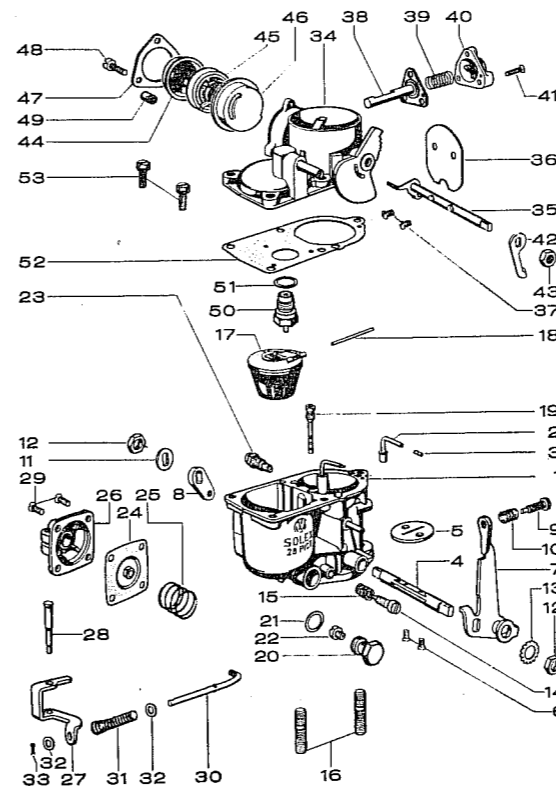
Exploded view of the Solex 28 PICT carburettor.
